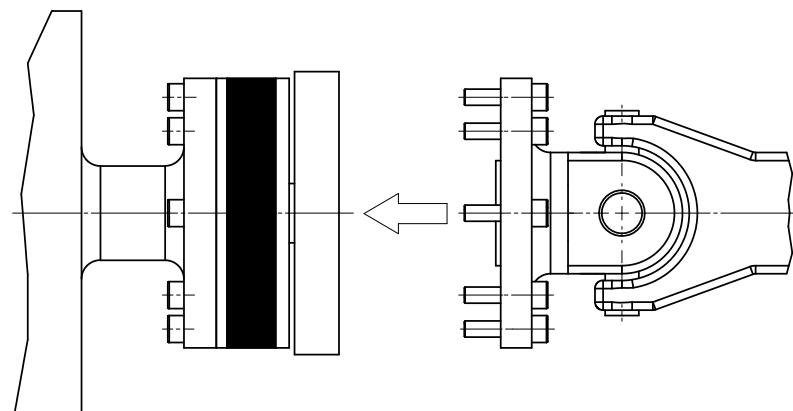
Coupling Mounting to Measuring Flange/Mounting Flange Assembly
